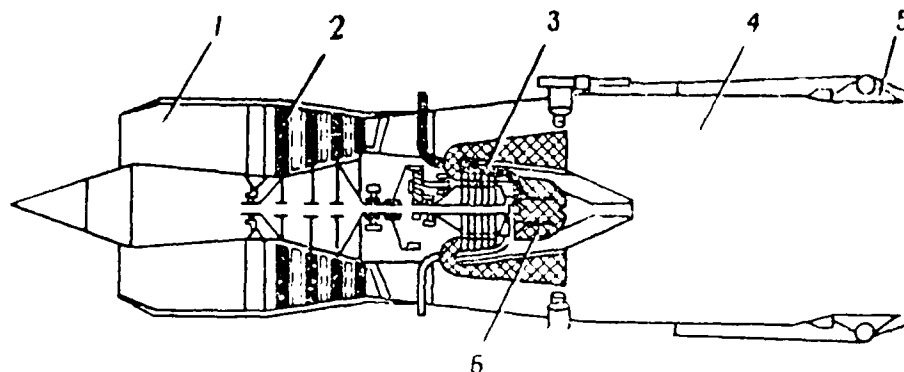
Diagram of a turbojet engine: 1 - air intake; 2 - compressor; 3 - turbine; 4 - afterburner; 5 - adjustable jet nozzle; 6 - combustion chamber (gas generator).
